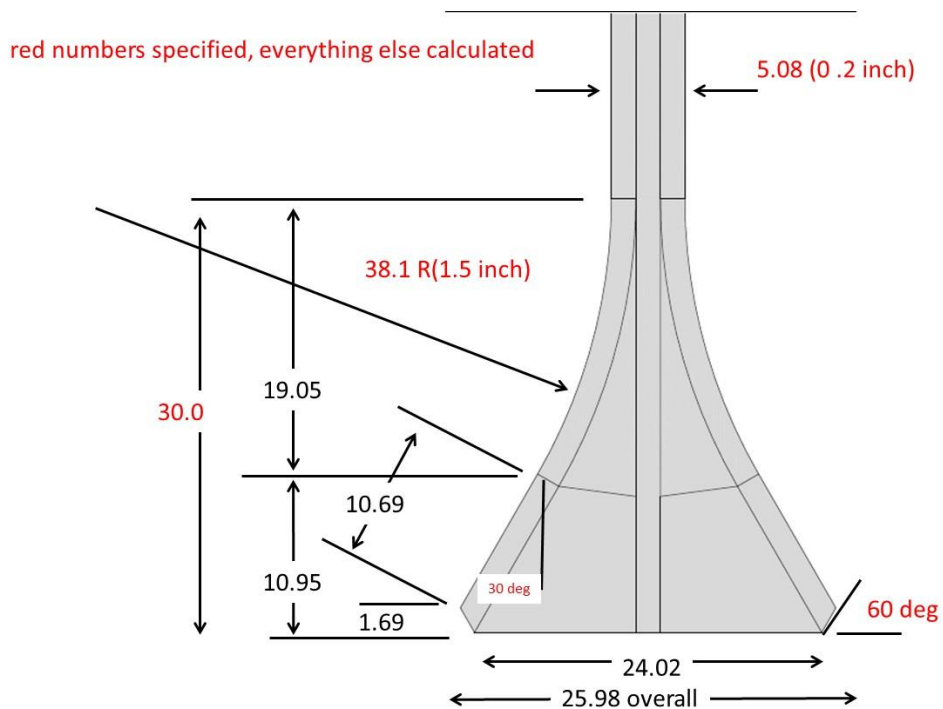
Schematic Drawing of Dovetail Attachment Region Of Subelement Test Specimen
